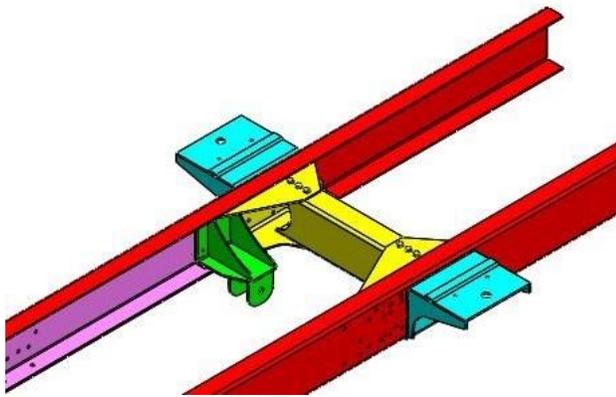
Rear crossmember with Air spring bracket Assembly
